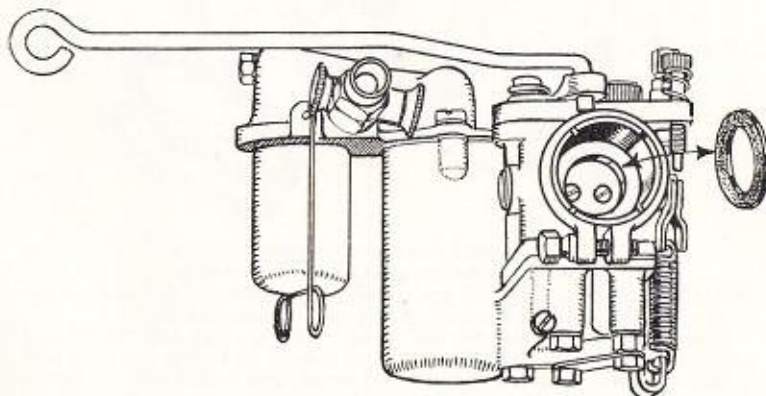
The stub gasket of the carburetter which should be carefully preserved.
